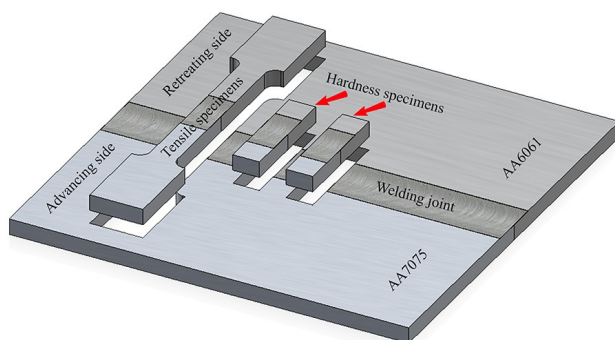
Mechanical Property Testing Process of Welded Specimens
